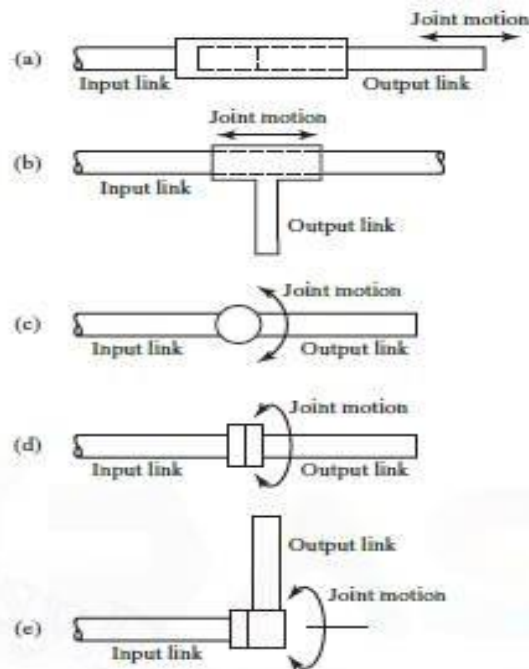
Five types of joints commonly used in industrial robot construction: (a) linear joint (type L joint), (b) orthogonal joint (type O joint), (c) rotational joint (type R joint), (d) twisting joint (type T joint), and (e) revolving joint (type V joint).
